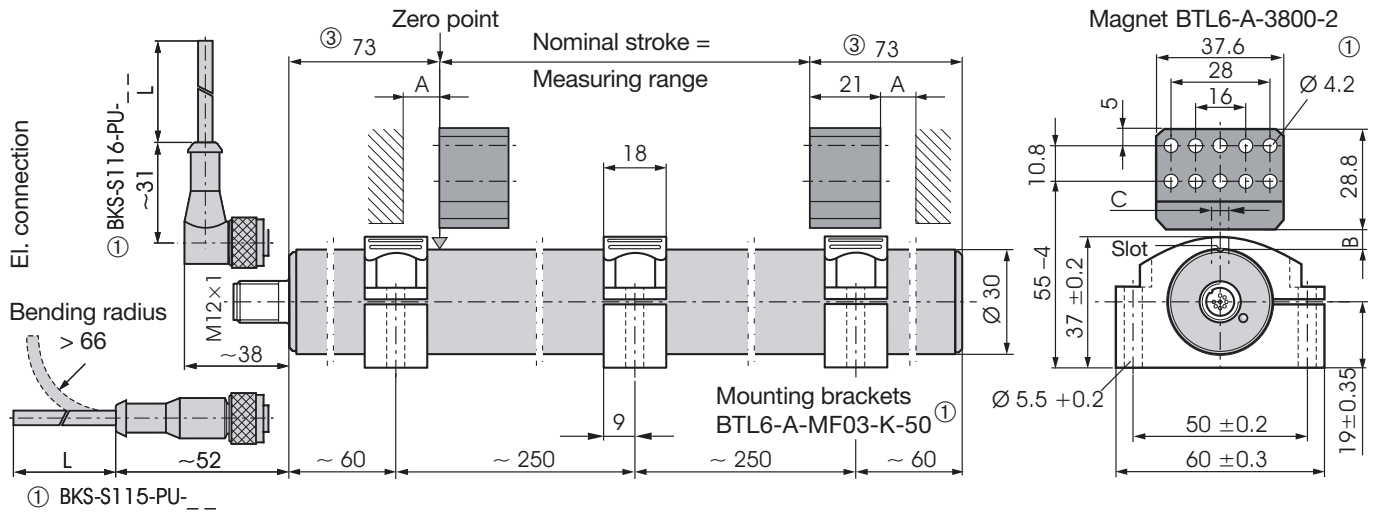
Dimensional drawing (BTL6...A1-S115 transducer with floating magnet BTL6-A-3800-2 and mounting brackets BTL6-A-MF03-K-50)
